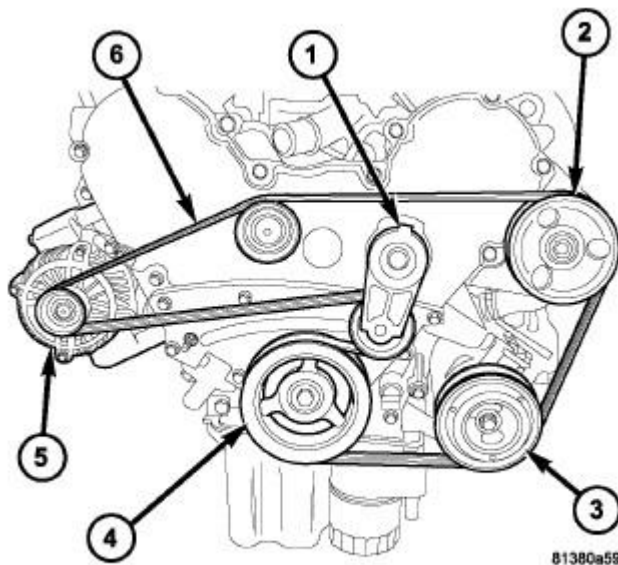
ACCESSORY DRIVE BELT ROUTING
